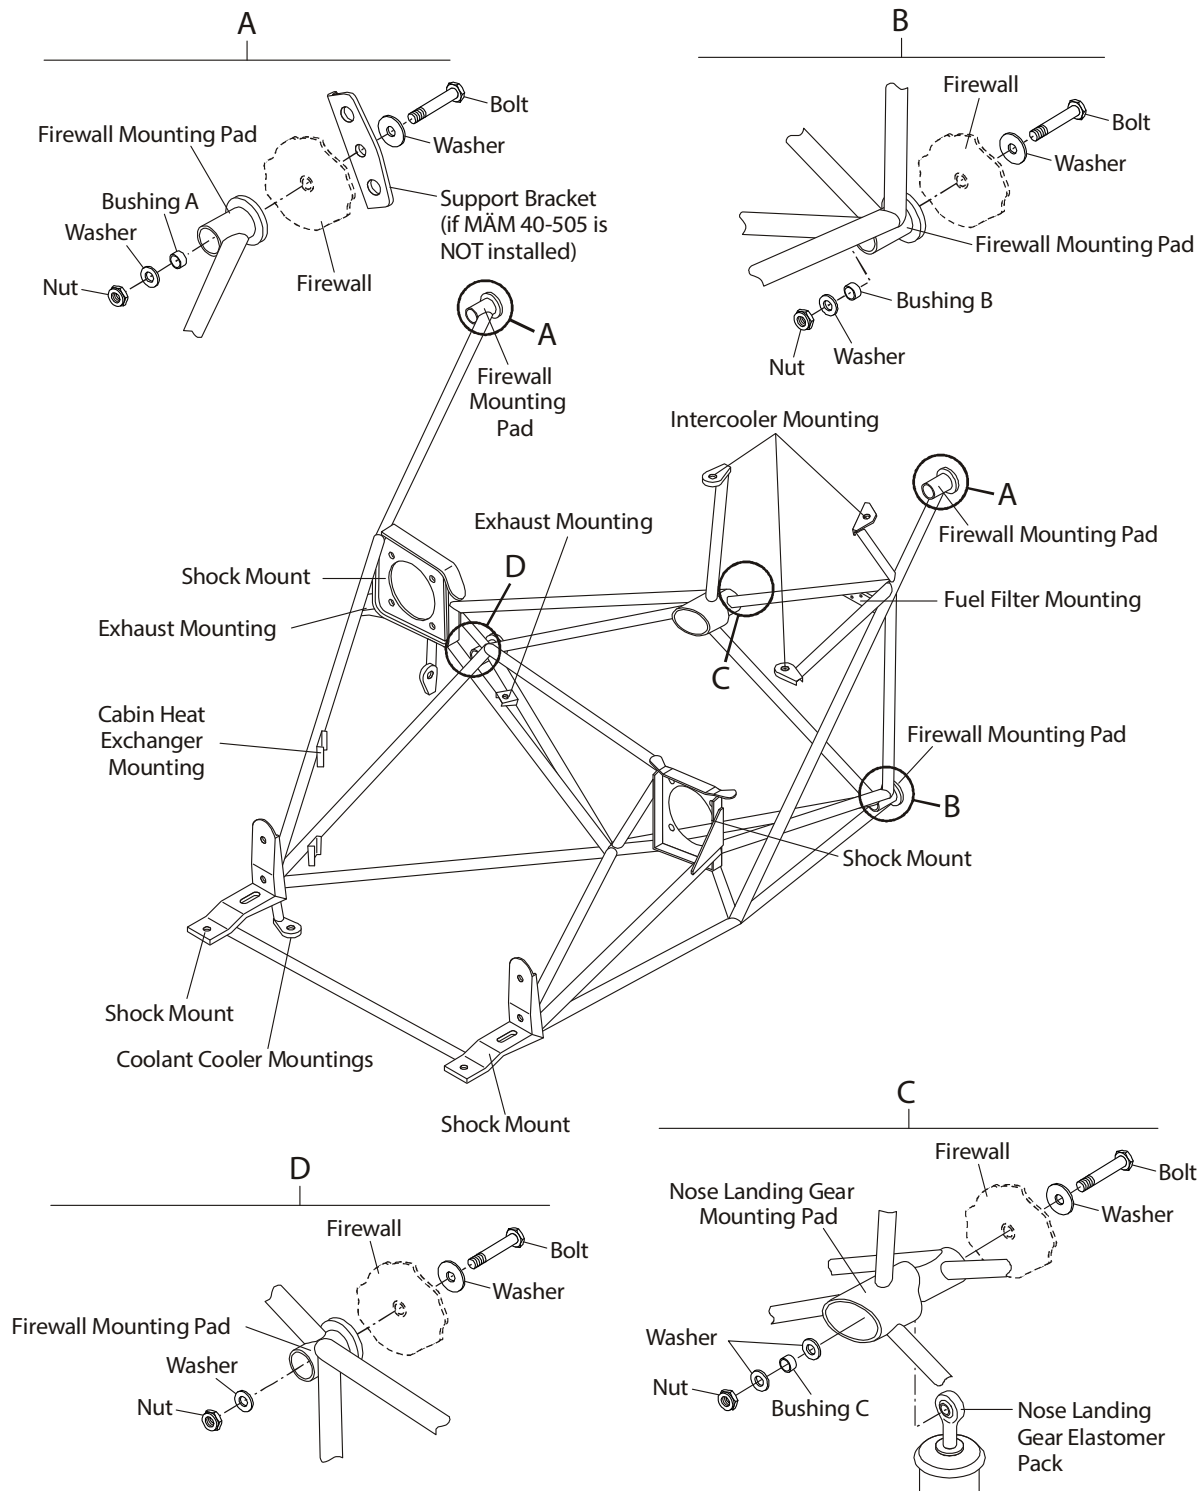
Engine Mount Assembly (if MÄM 40-434 is installed)
